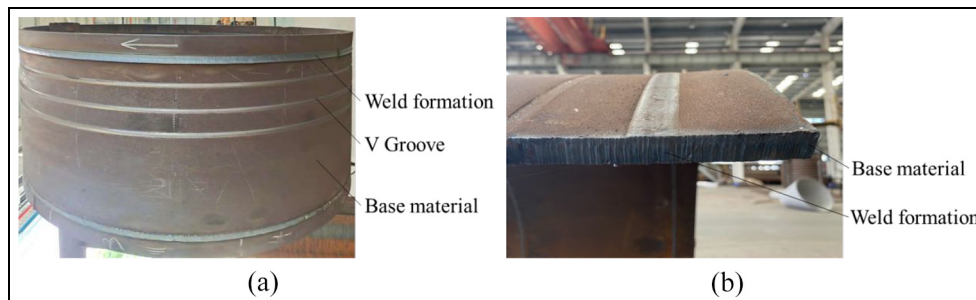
Weld forming: (a) appearance of weld forming and (b) weld section view.
